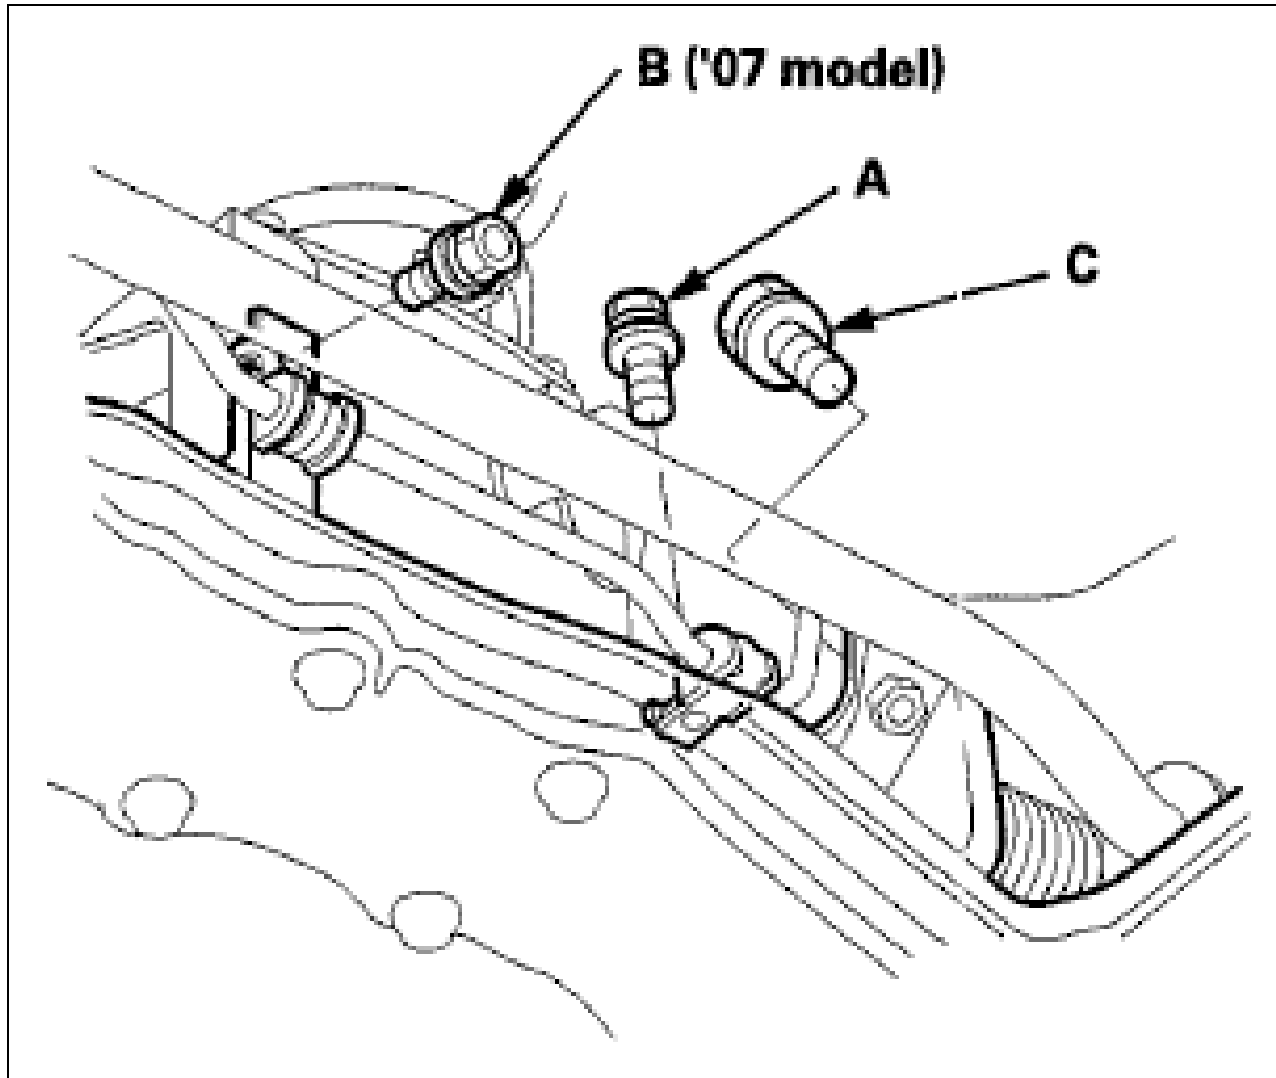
Identifying Torque Converter Cover And Drive Plate Bolts
